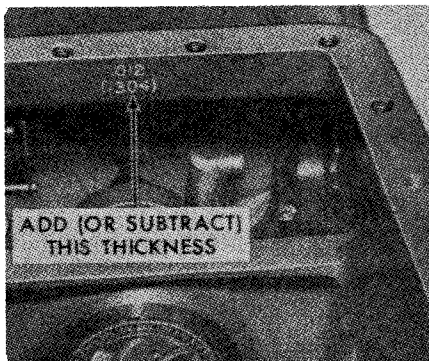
Normal shim (9—Fig. 173) thickness for pinion mesh adjustment is 0.041 inch. If other than this thickness is required, it is indicated by stamping on rear axle center housing in location shown. Refer to text.
